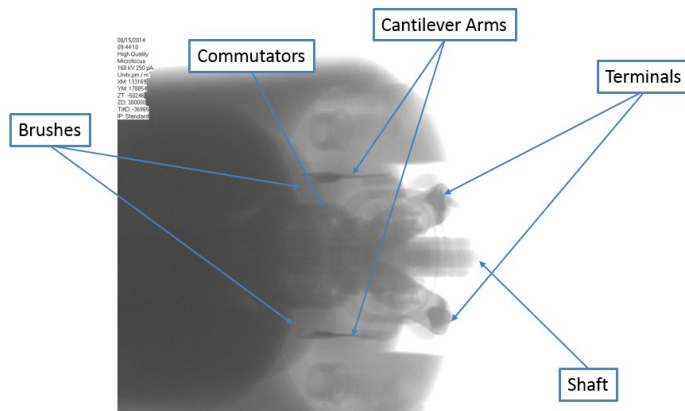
X-Ray Image of the Brush/Commutator Assembly
